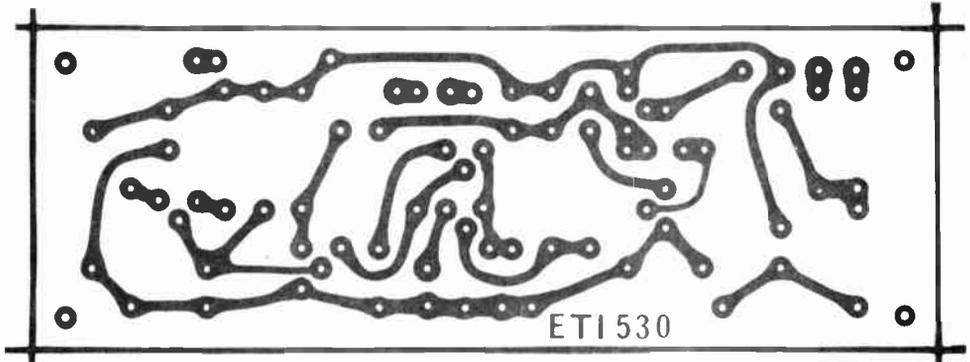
(Above) Printed circuit board, common to all controllers described, has full size dimensions of 120 x 41 mm.
